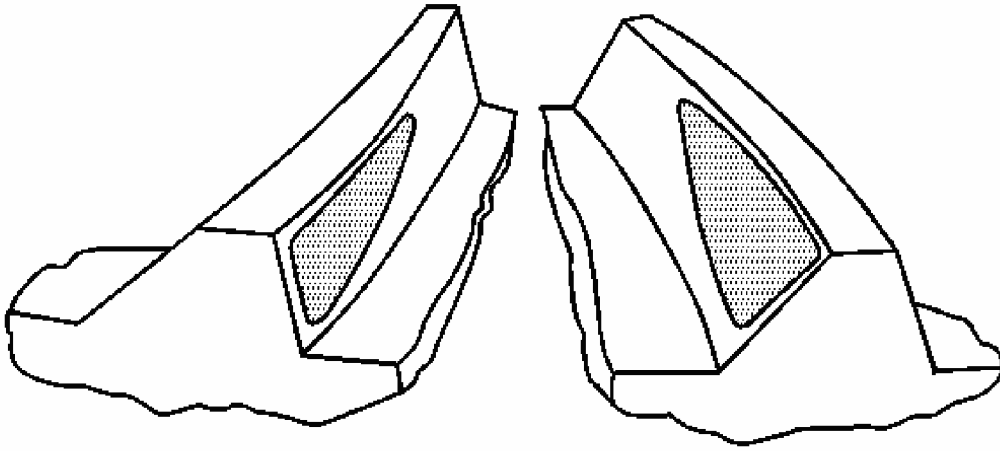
Identifying Drive Side Heel - Coast Side Heel Contact Pattern
